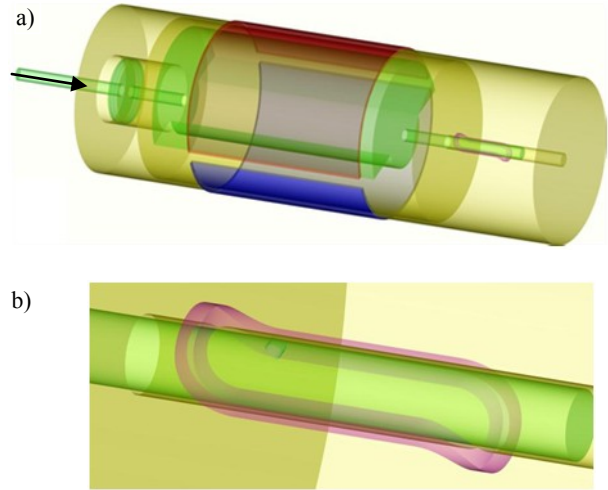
a) View of the engine in the initial phase of the cooling stage, b) view of the cam mechanism; the slider is in the location corresponding to the location of the piston in the initial cooling phase
